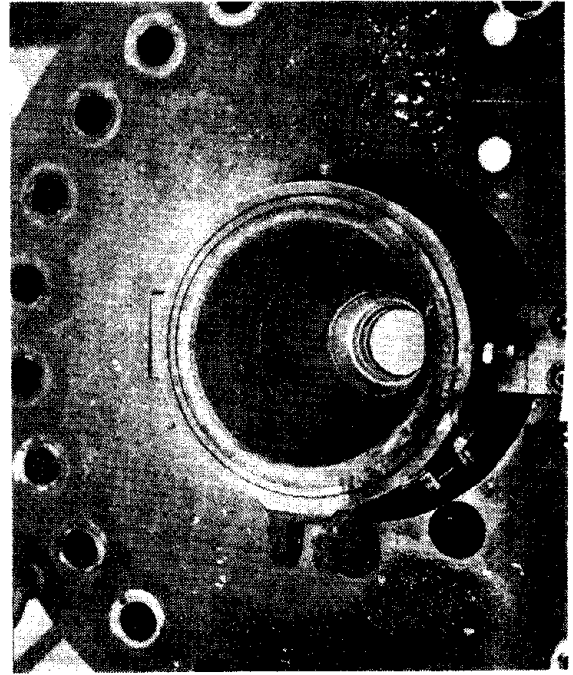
Postfire View of HIPPO Miniseal Nozzle Assembly
